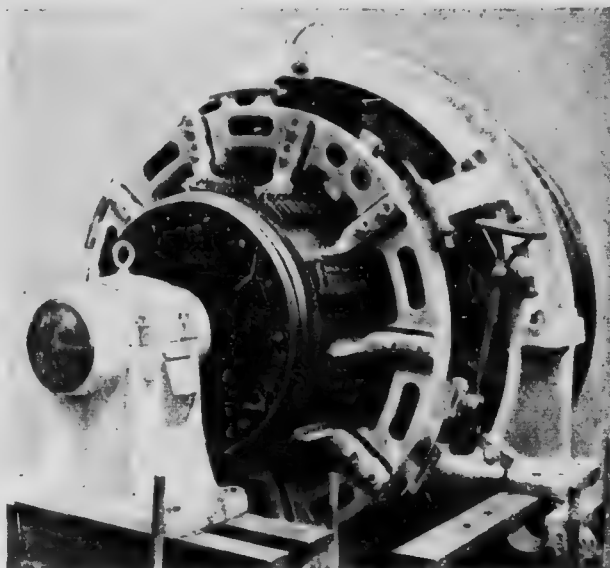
Mounting of Brush Rigging on a Brush Electrical Engineering Company's Dynamo.
